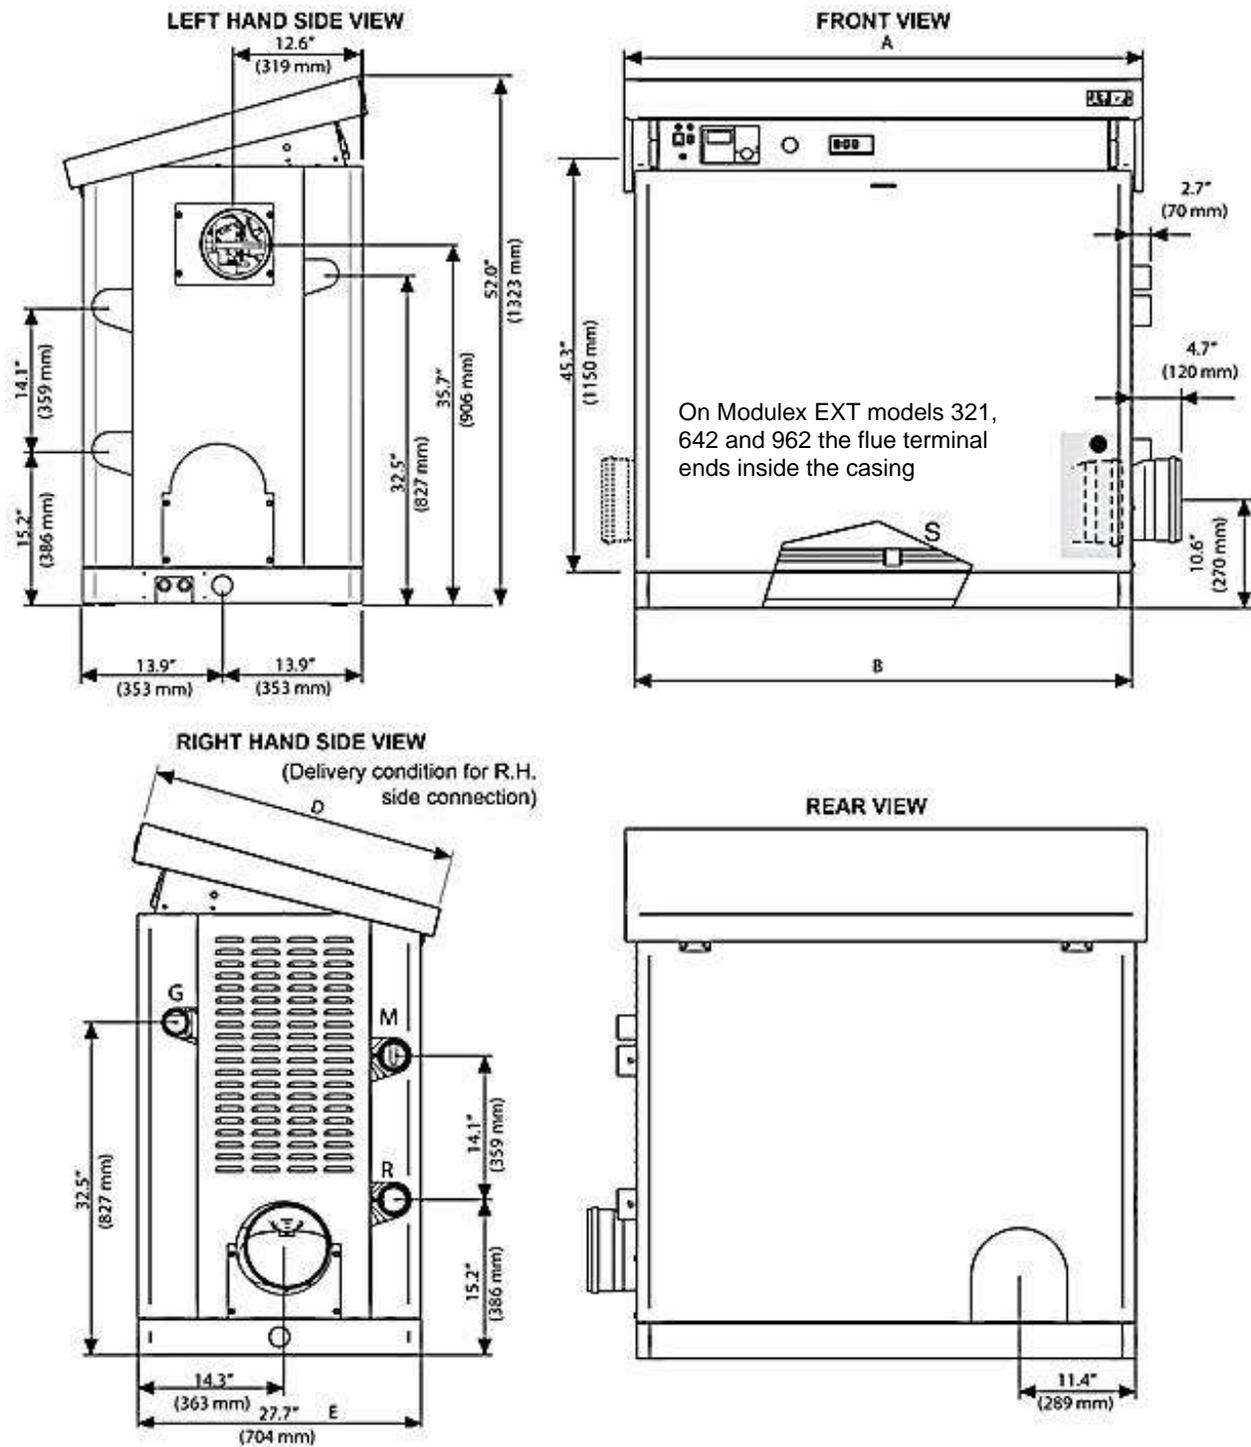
MODULEX EXT Dimensional Drawings (Side Views)
